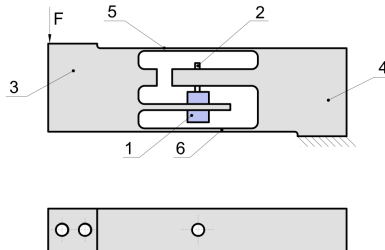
Inductive measurement beam, 1- inductive displacement sensor, 2 – sensor core, 3 – movable part of the beam, 4 – fixed part of the beam, 5,6 – measuring springs.
